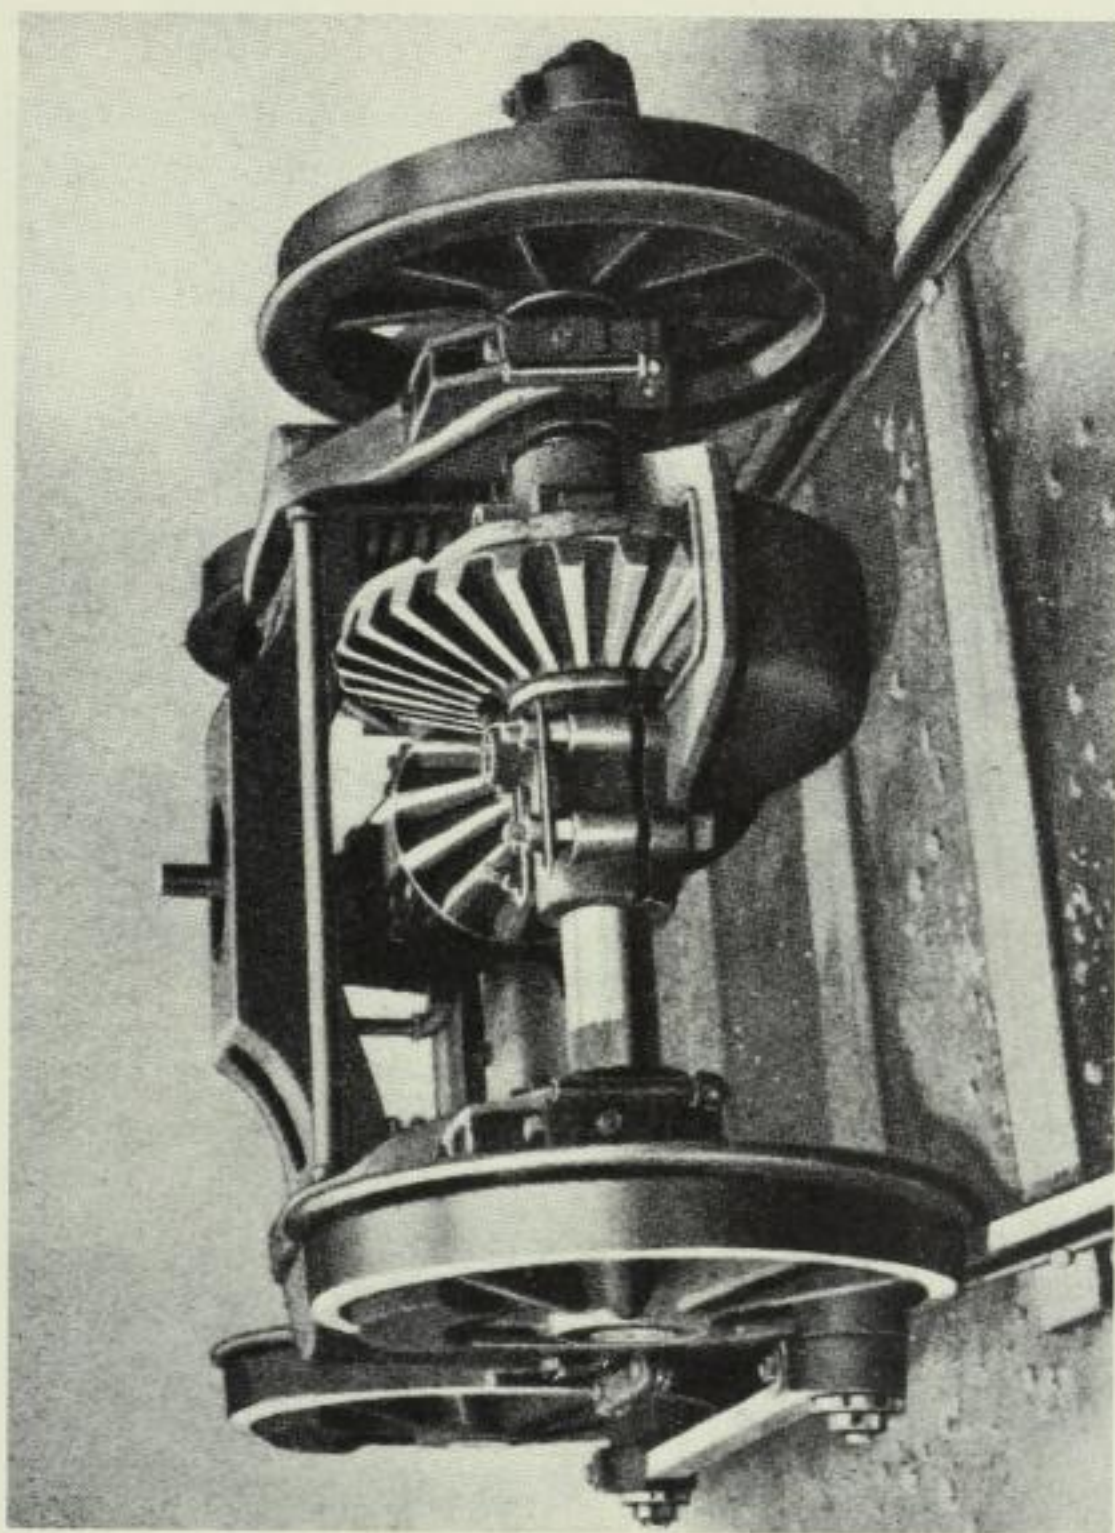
Heisler Geared Swivel Steel Truck with Gear Cover Removed.
